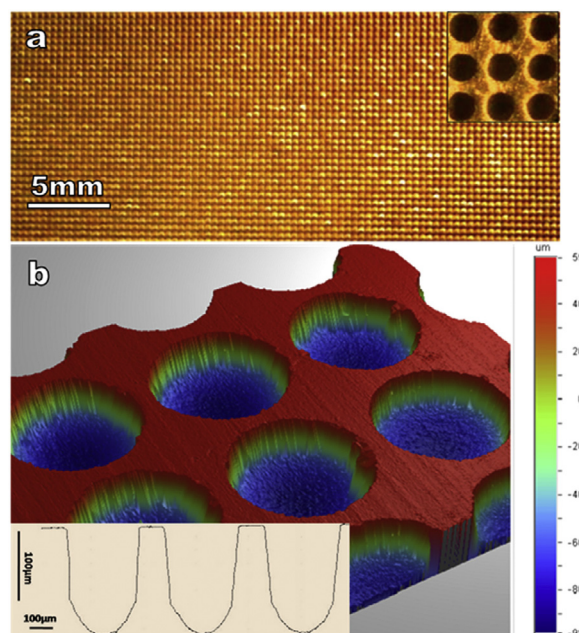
(a) Textured brass surface containing a regular array of blind holes. The surface dimensions are $100\ \text{mm} \times 30\ \text{mm}$. The inset shows a zoomed-in view ($1\ \text{mm} \times 1\ \text{mm}$) of the blind holes in which air can be trapped. (b) Surface profile of the textured hydrophobic surface used for the experiment obtained using an optical profilometer. Inset shows the contour of the surface. Hole diameter is $300\ \mu\text{m}$, pitch $365\ \mu\text{m}$ and depth $160\ \mu\text{m}$.
